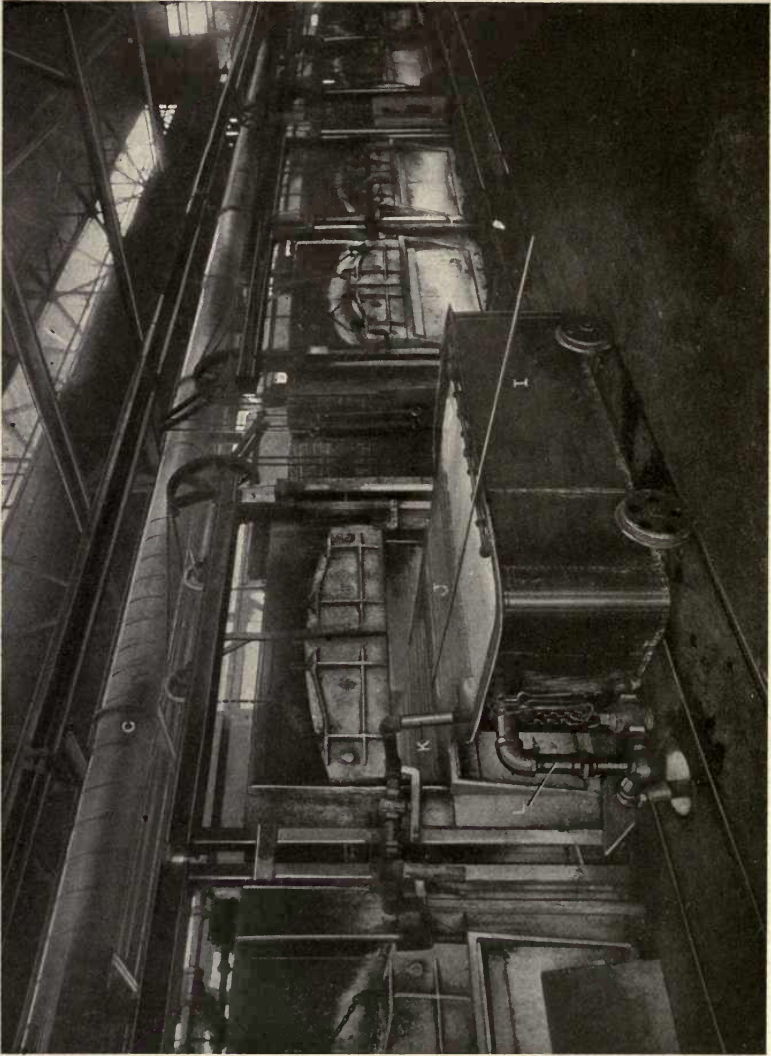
Oil Quenching Tank Ready for Receiving Automobile Drive Shafts from the Furnace.
